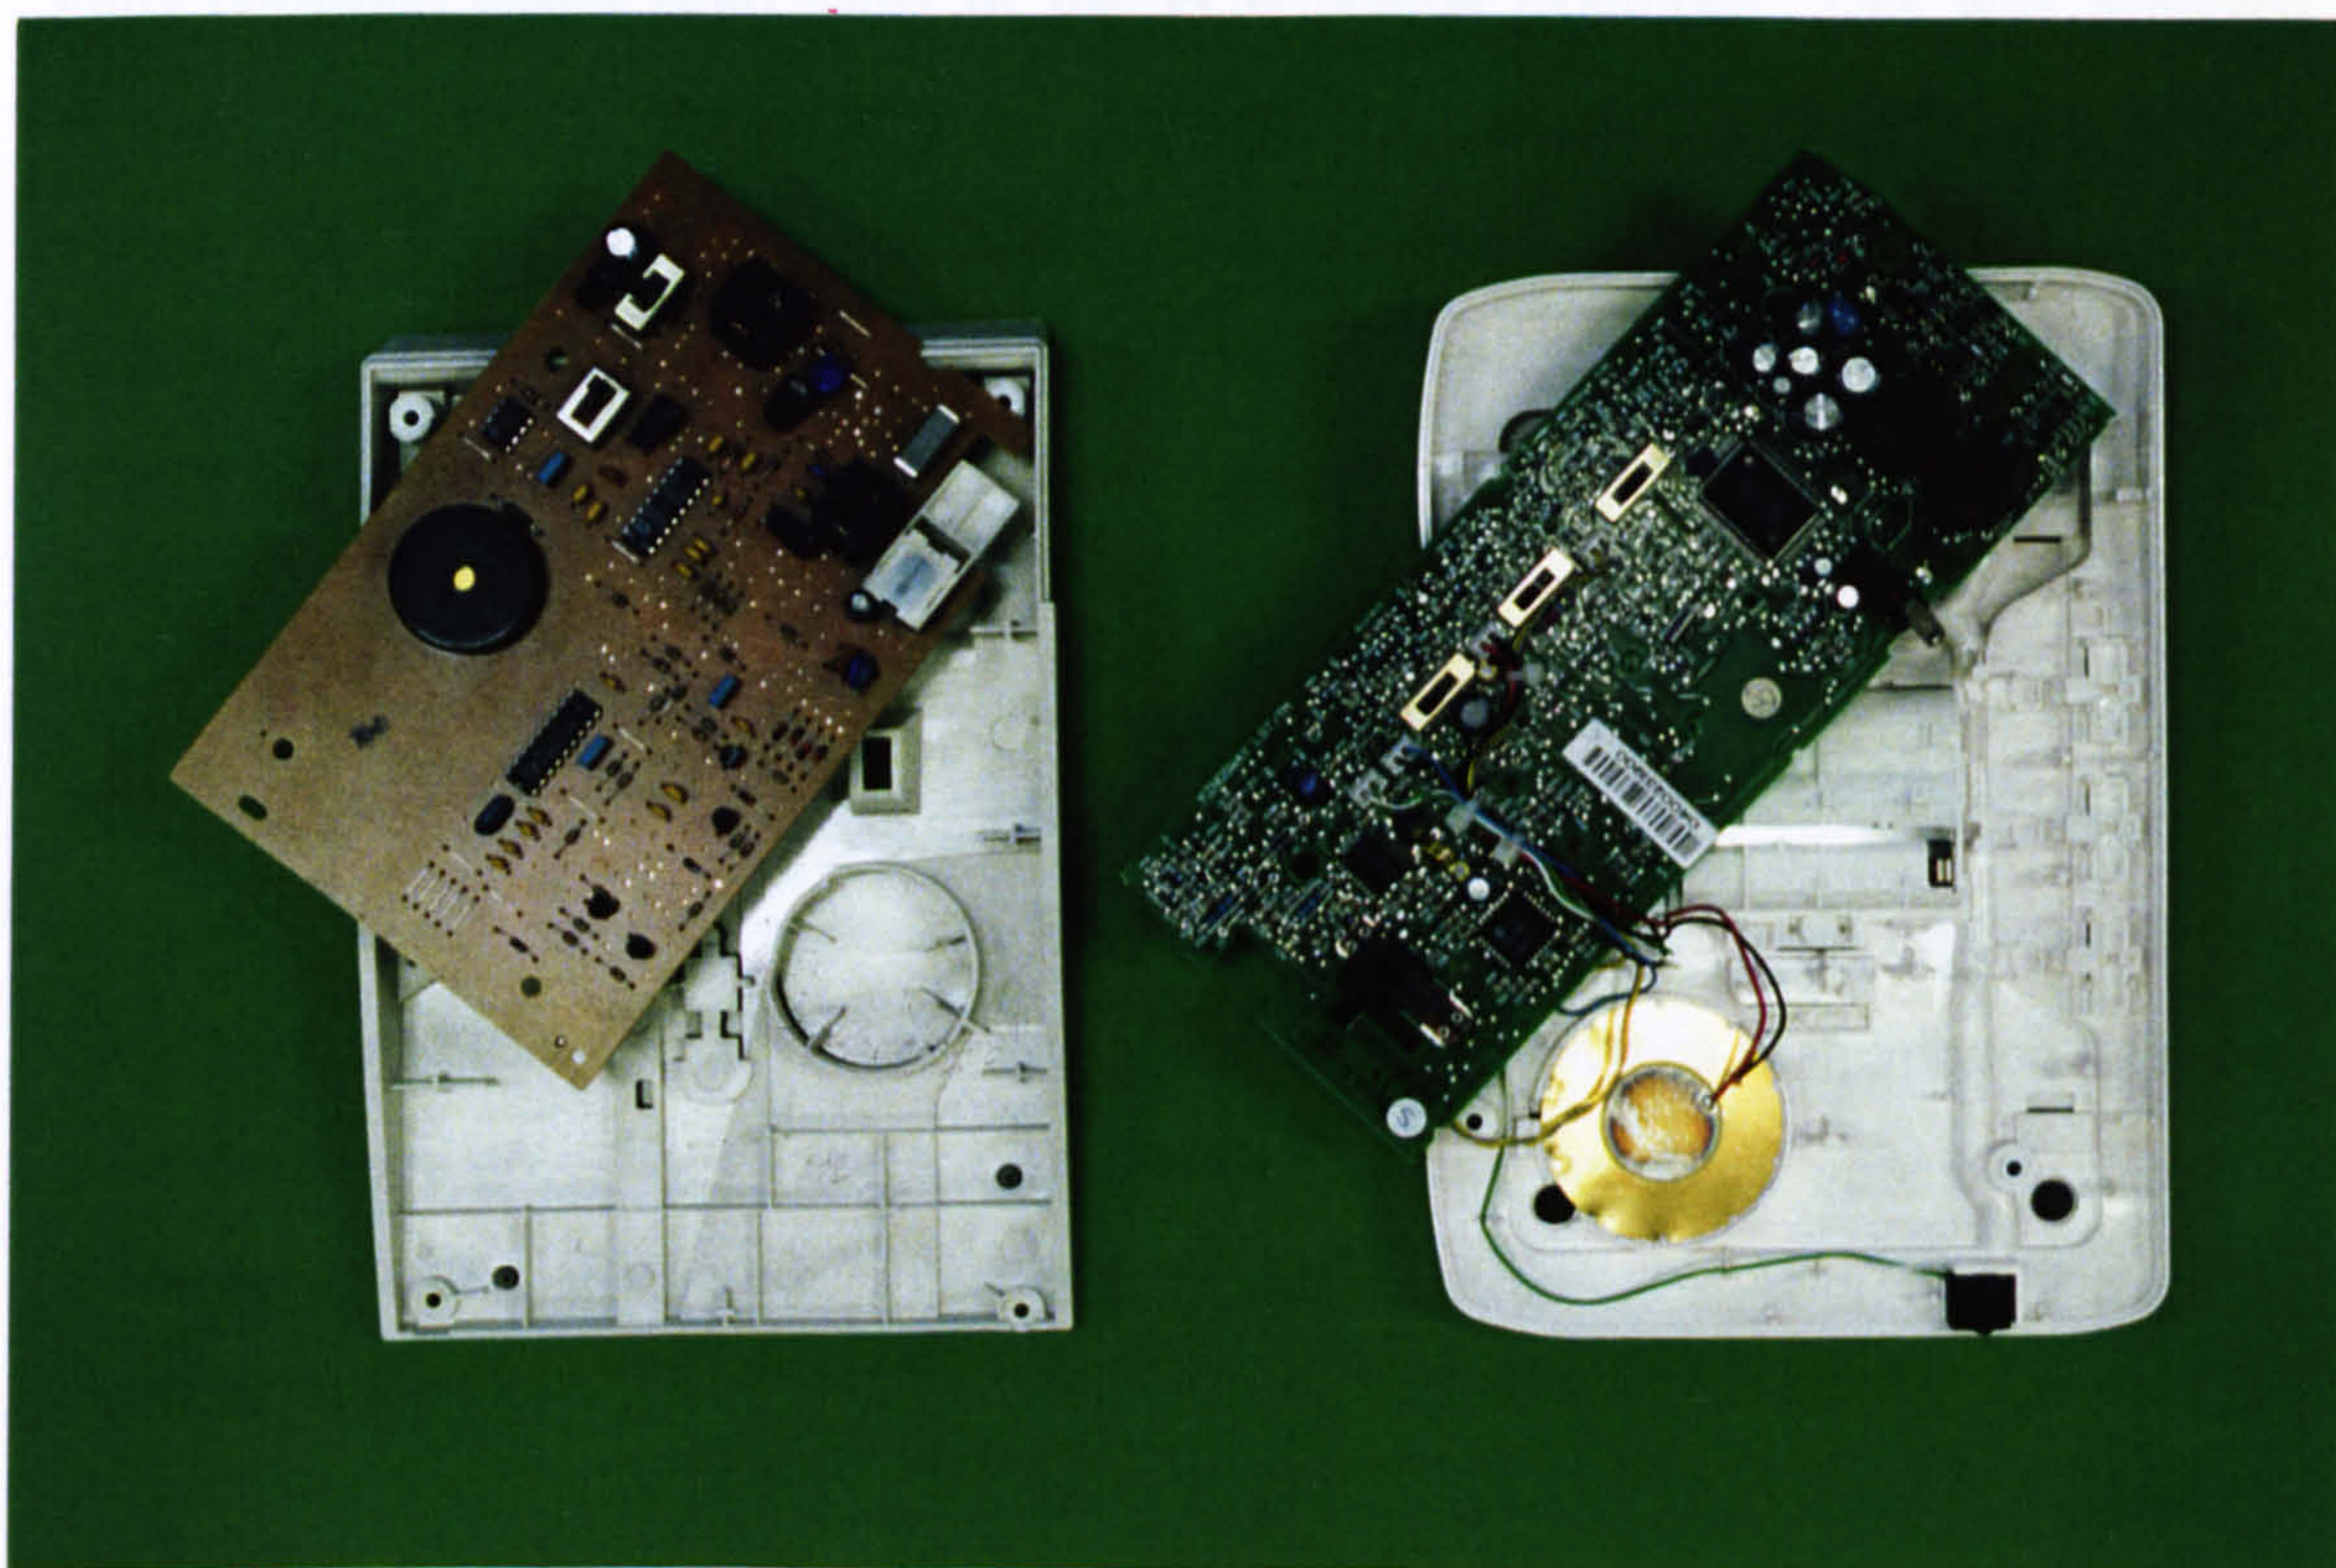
PCB layout of the Euroset 802 incorporating all electronic components (left) and PCB layout of the Relate 300 with separate mount for tone ringer and connecting wires (right)
